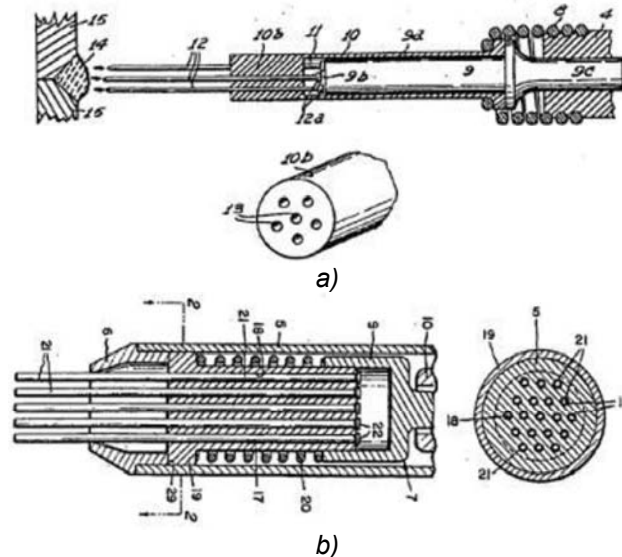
Sectional view through tools with freely movable strikers for surface impact treatment: a – described in [4], b – described in [5]
